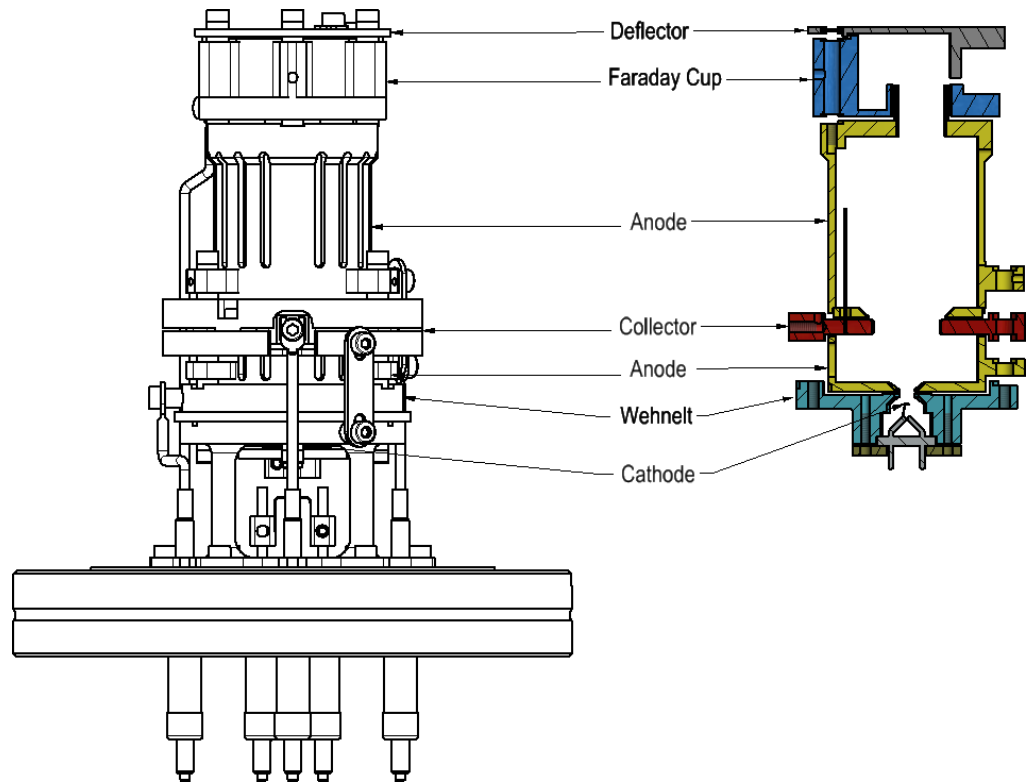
Lateral view and cross section representation of the IRG080 gauge head
